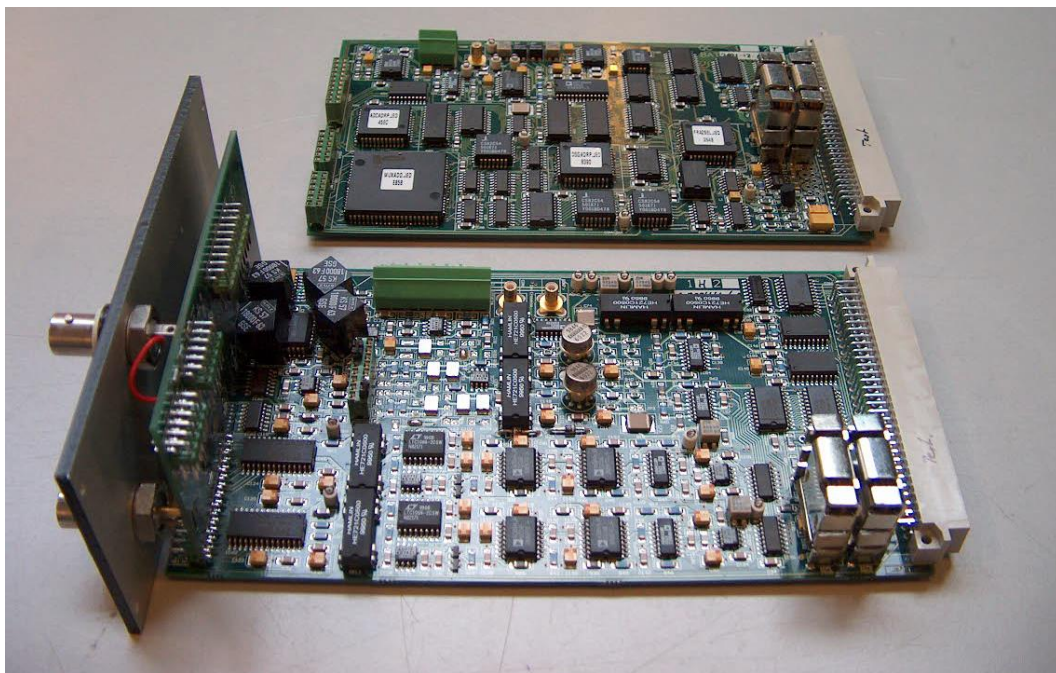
The removed DSG PCB and the Analog PCB of the FRA2 module
